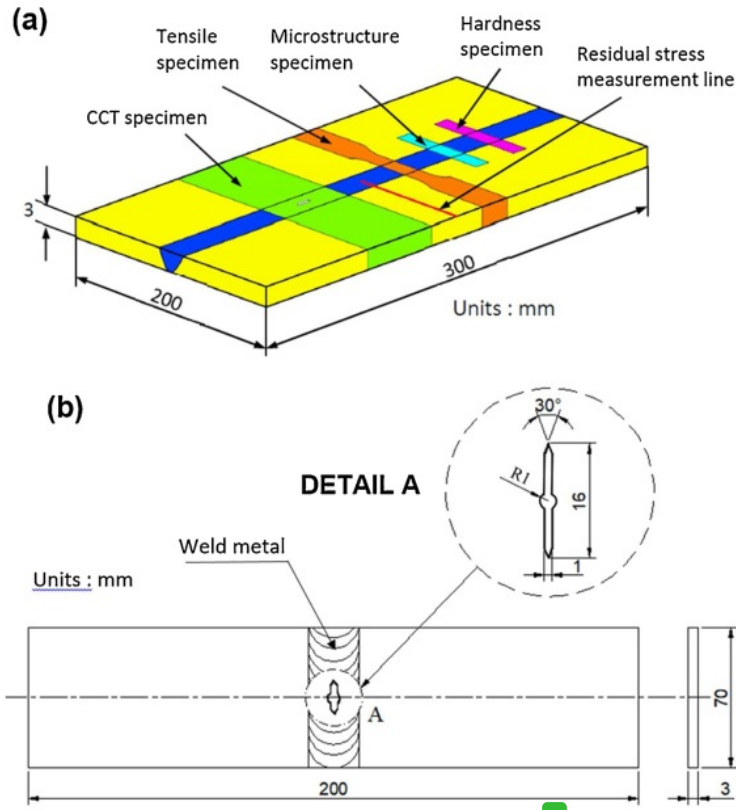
(a) A schematic of welded plate showing the locations of test specimens; (b) centre-cracked tension (CCT) specimen.
